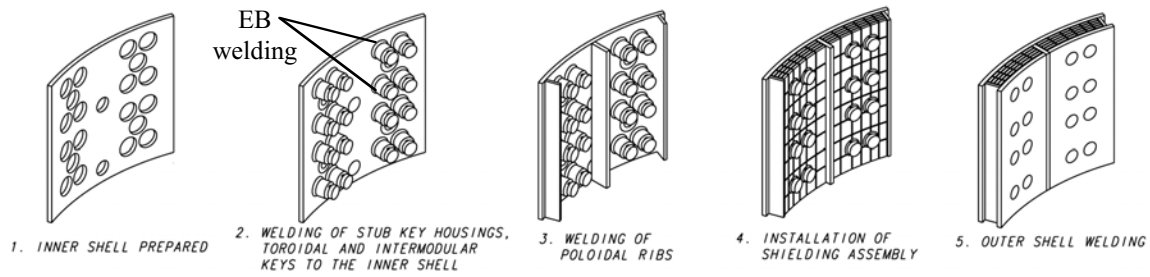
Direct Welding of the Module Supports and Keys
